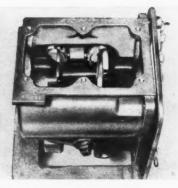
Transmission shifting mechanism (mainshaft assembly is cocked away from the shift fork and shoe).
